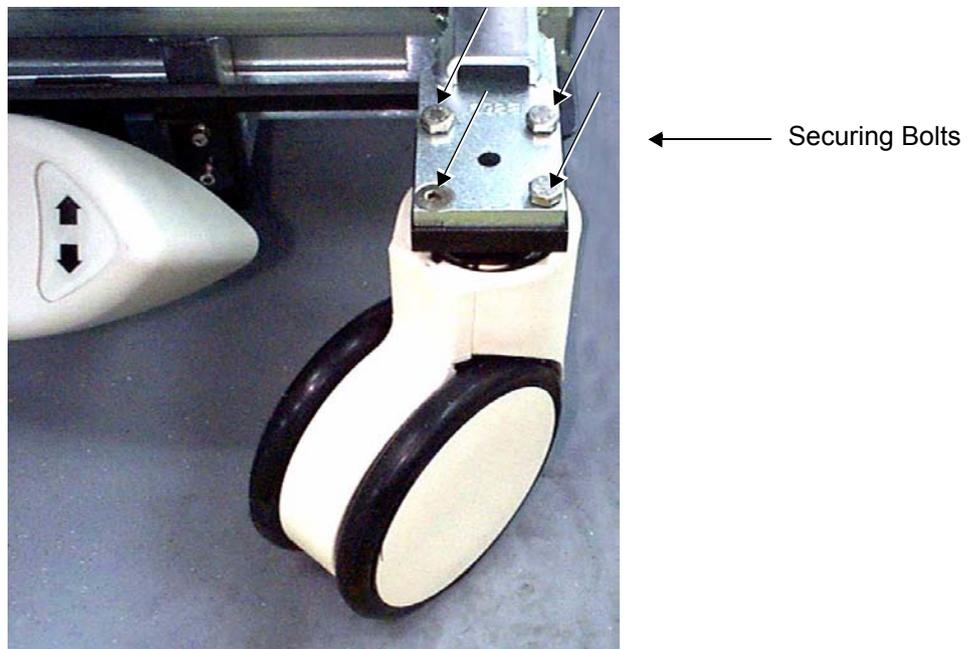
Front Wheel (Part No 2269437) Bolted to Chassis
